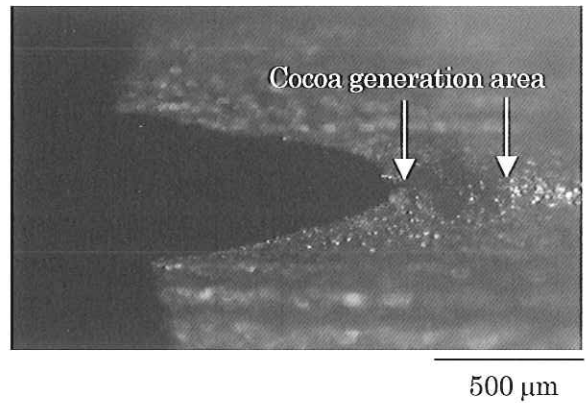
Cocoa made by fretting between two fracture surface
